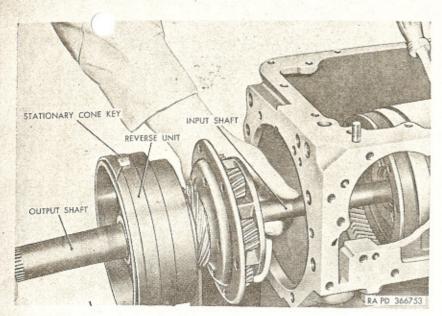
Removing or installing input shaft, reverse unit, and output shaft (303M).
